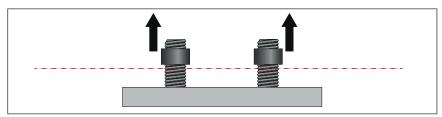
HV BM 1.2, power cables HV- (≤35 mm²), removing the spacer sleeves from the threaded bolts
